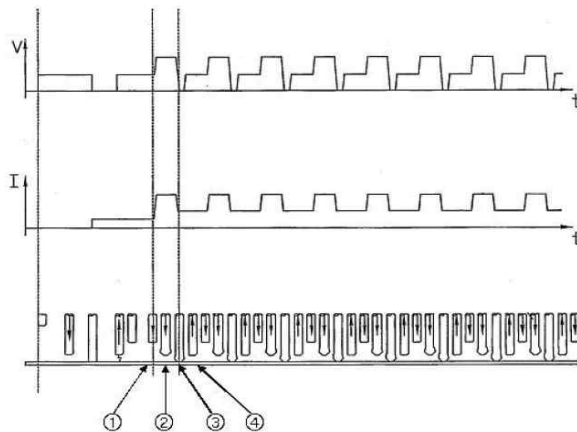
Schematics of welding waveform and wire feeding control in CMT process
